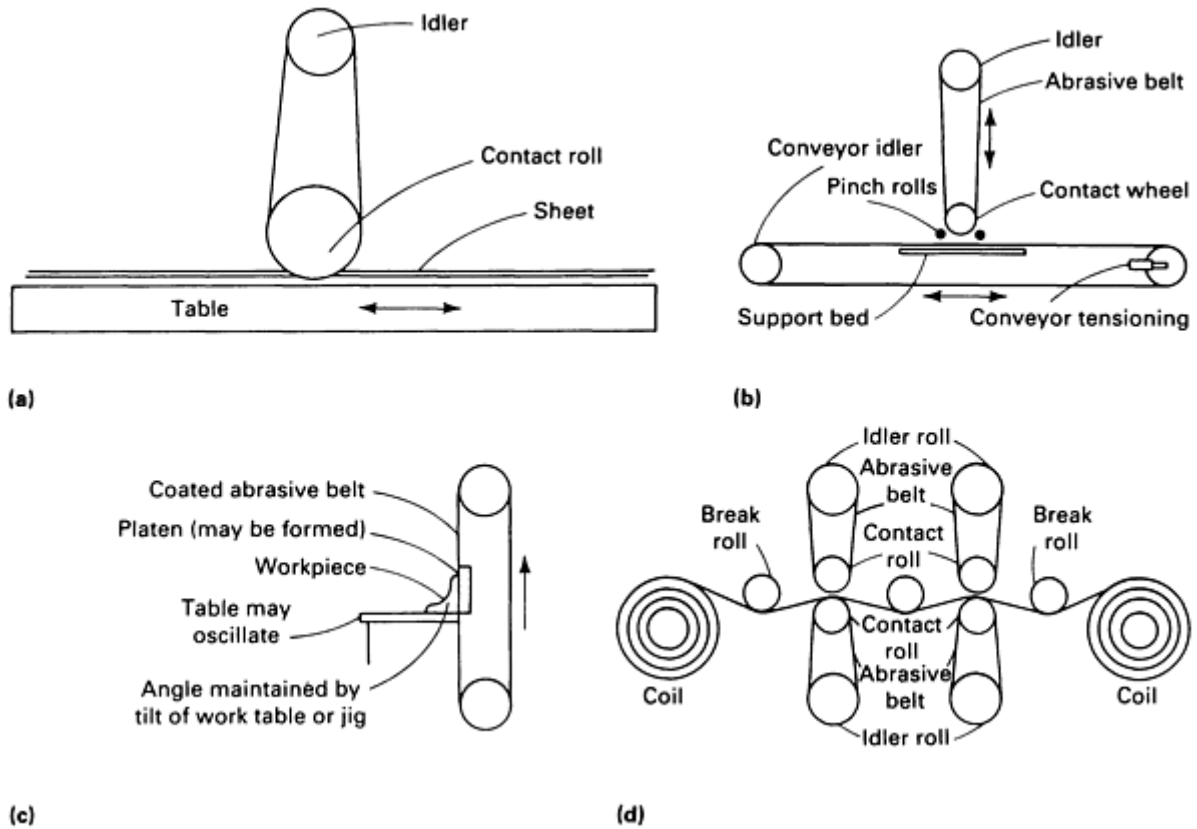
Schematics illustrating the primary components of coated abrasive precision grinding operations. (a) Sheet dimensioning. (b) Conveyor grinding. (c) Vertical-platen sanding. (d) Coil
